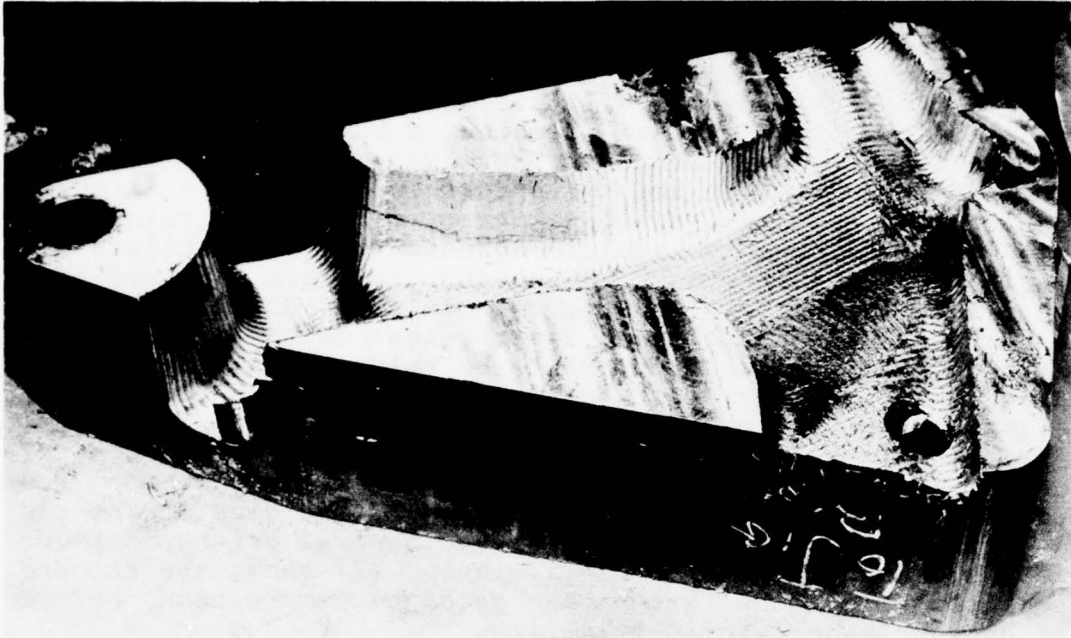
TOP AND BOTTOM BONDING DIES, ROUGH MACHINED.
